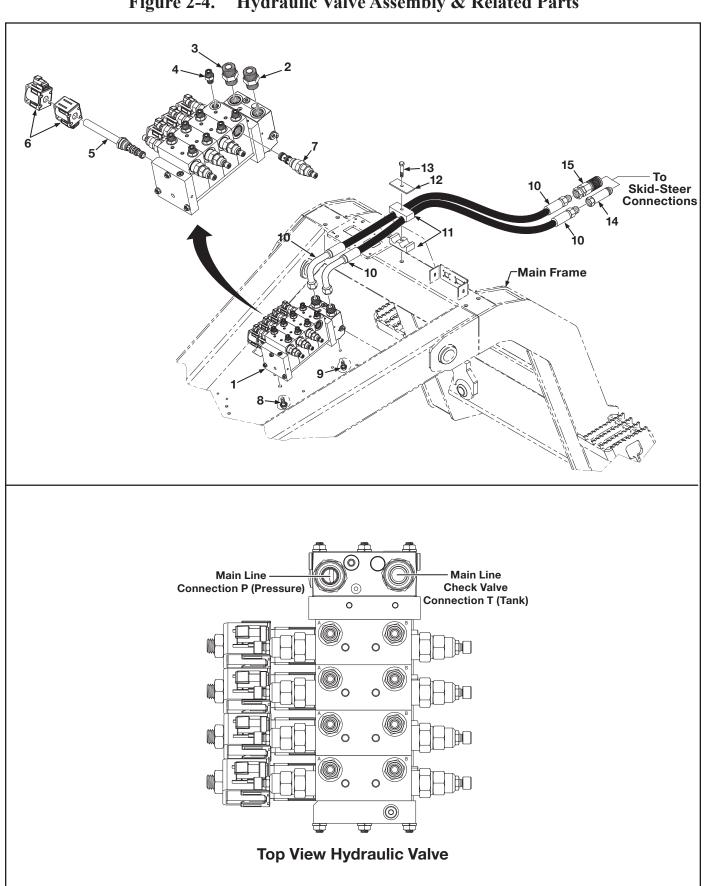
Hydraulic Valve Assembly & Related Parts
